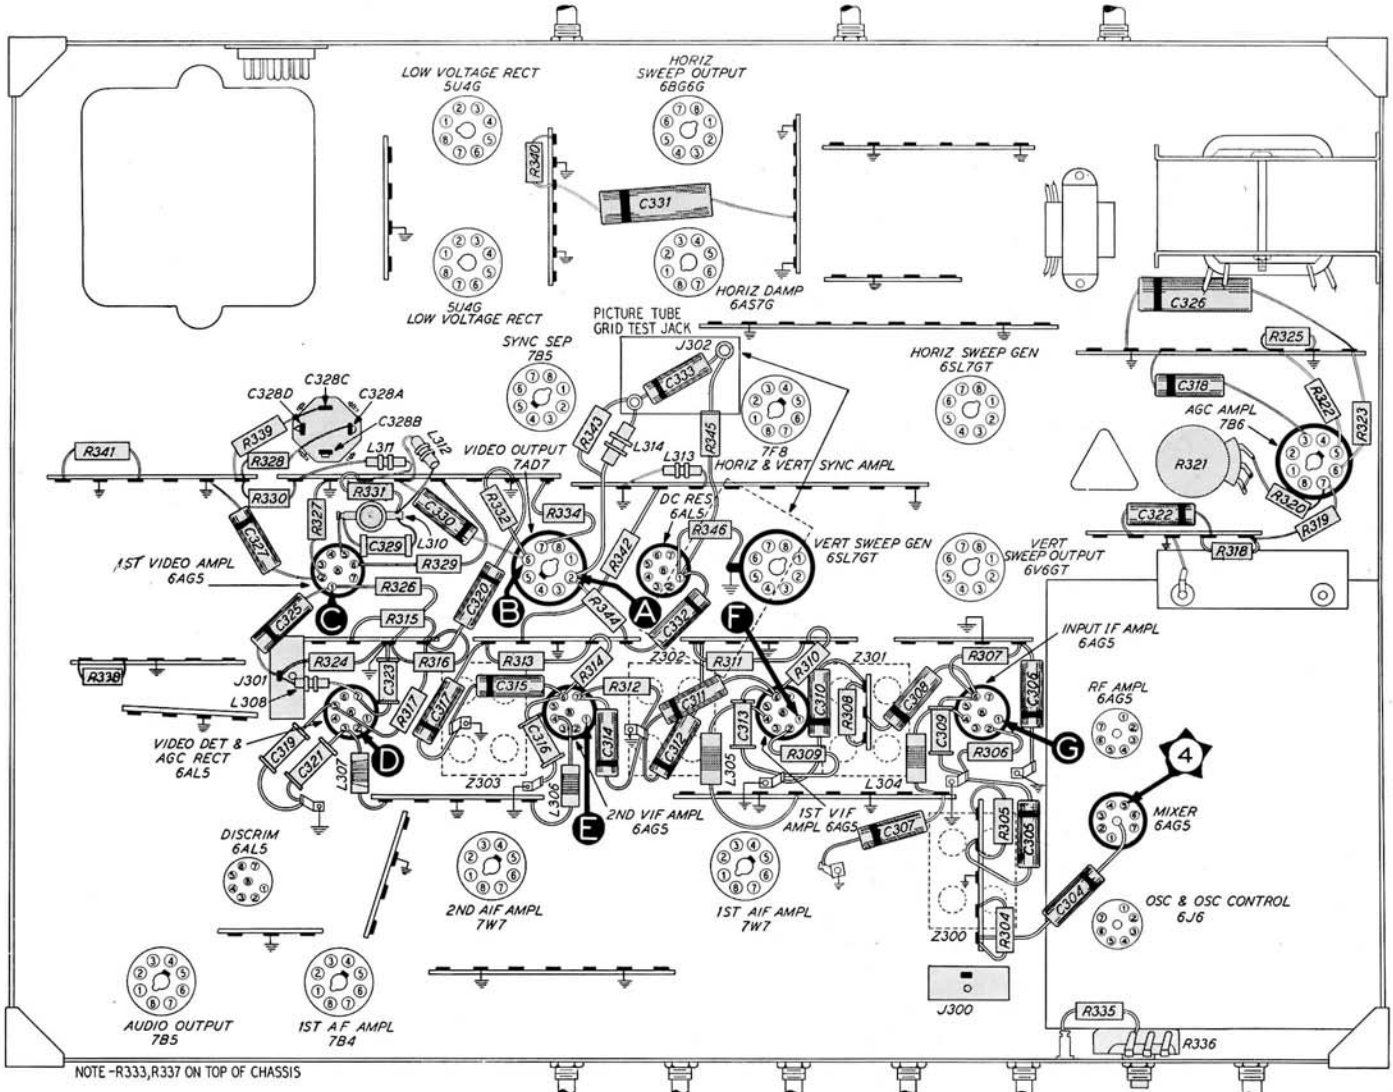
Bottom View of Chassis, Showing Section 3 Test Points
